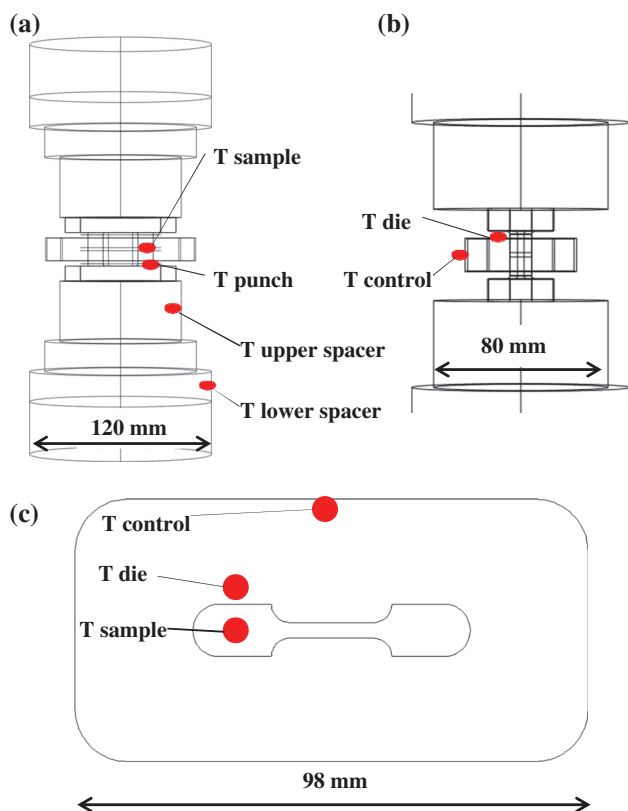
Position of the six thermocouples: lower and upper spacers, punch, sample (a); control, die (b) and horizontal cross-section of the die, showing position details (c)
